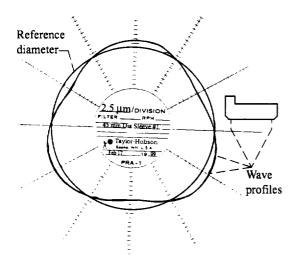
Measured profile at both edges of the bearing sleeve inner diameter prior to test.
